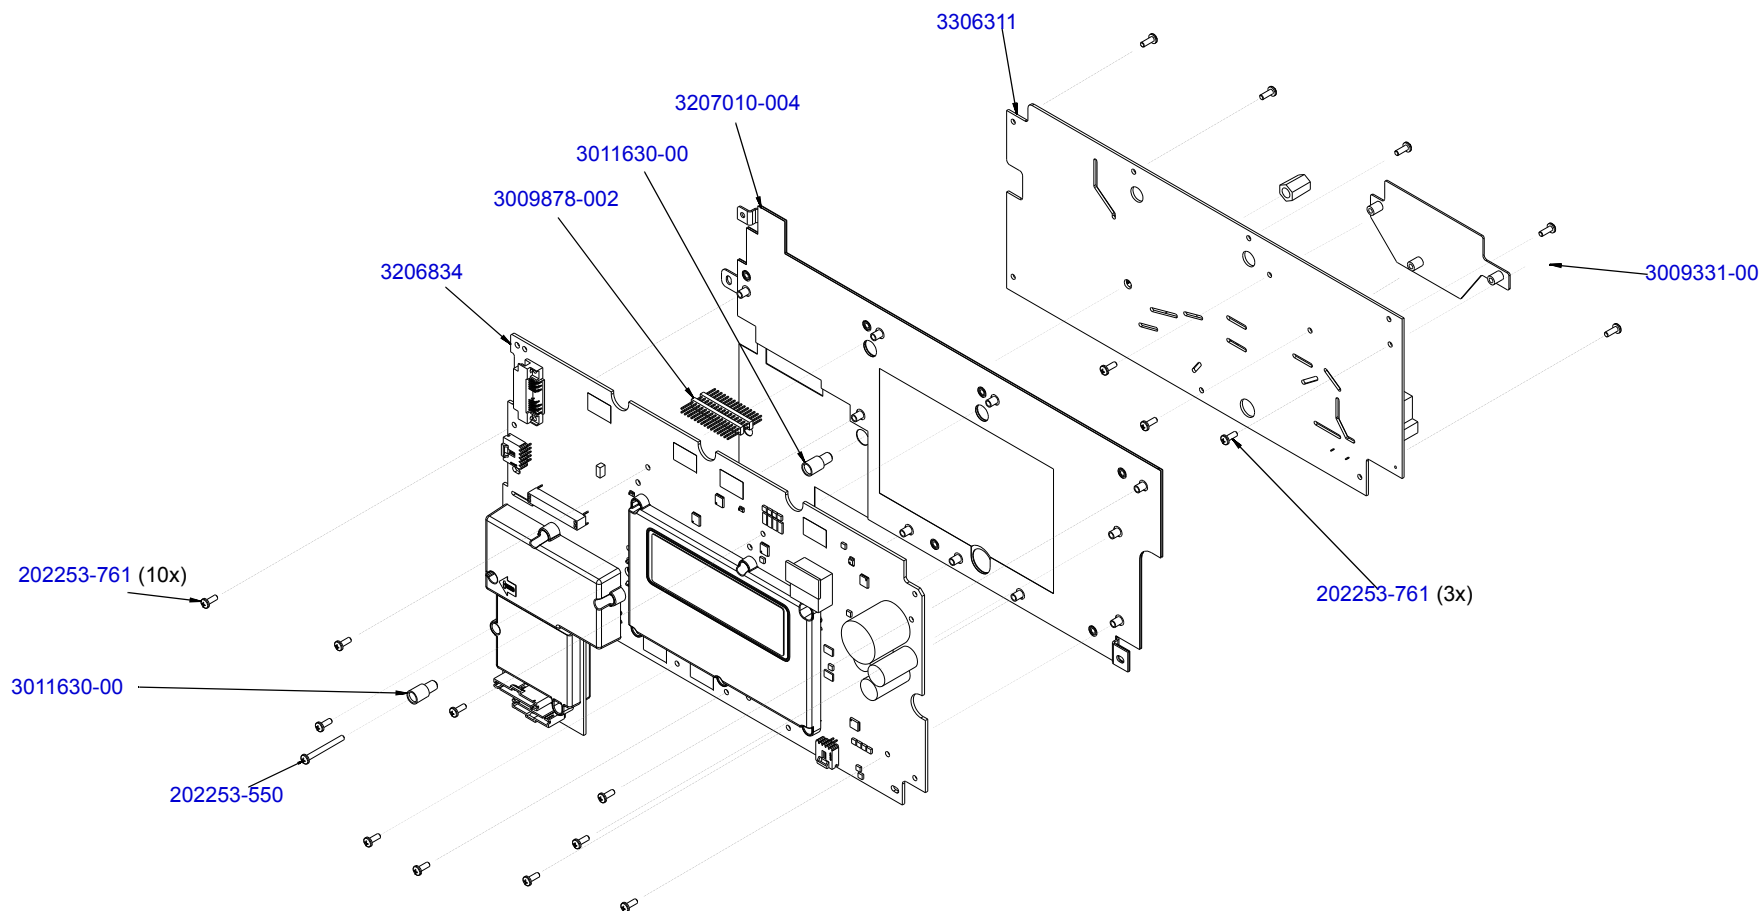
System/Therapy PCB assembly view 1 of 2
